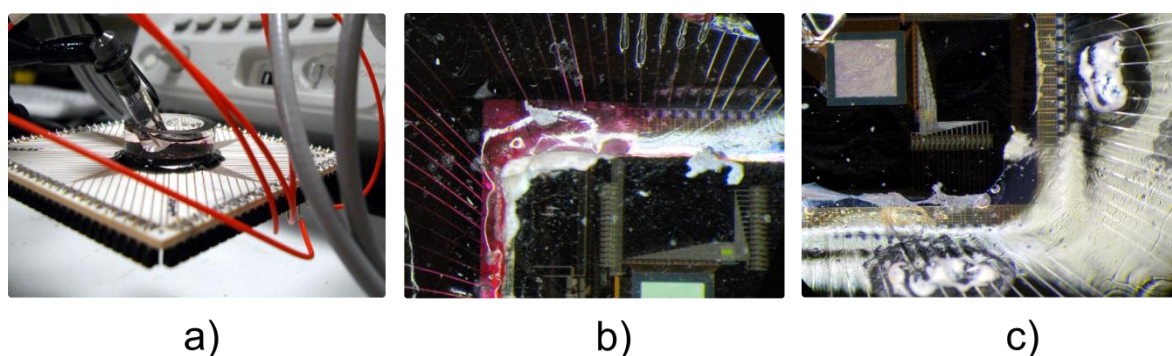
Initial bonding attempt (a) having the pads bonded to the copper tracks on PCB. (b) demonstrates long-term damage of salt residue and (c) shows short circuit through the RS Components general purpose potting epoxy.
